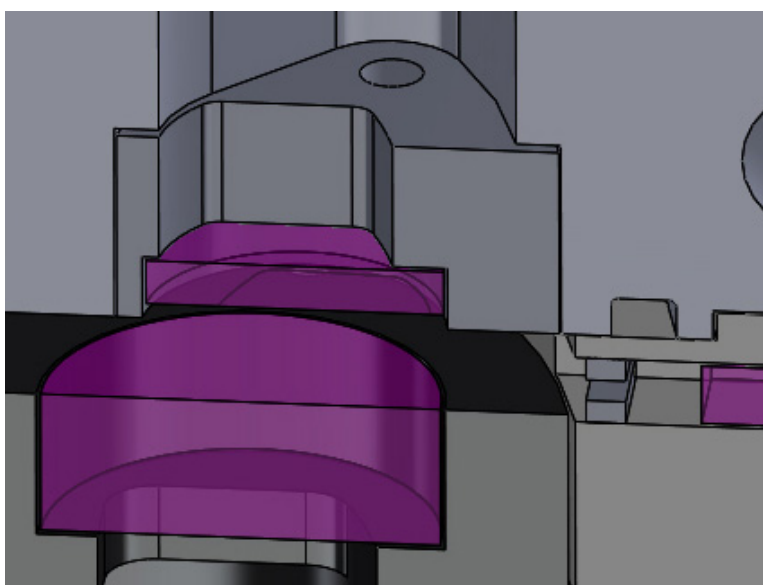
Cross sectional view of the HCCI piston crown and recessed head window.
